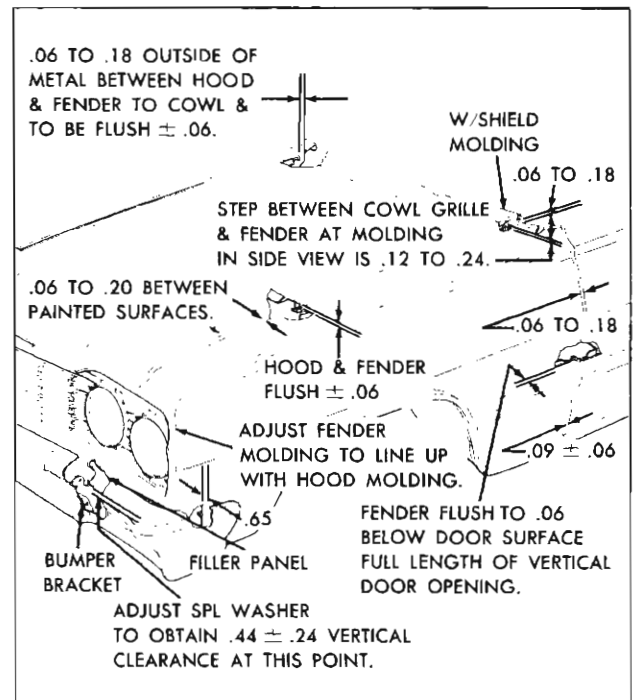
Sheet Metal Adjustment (Related Parts)
